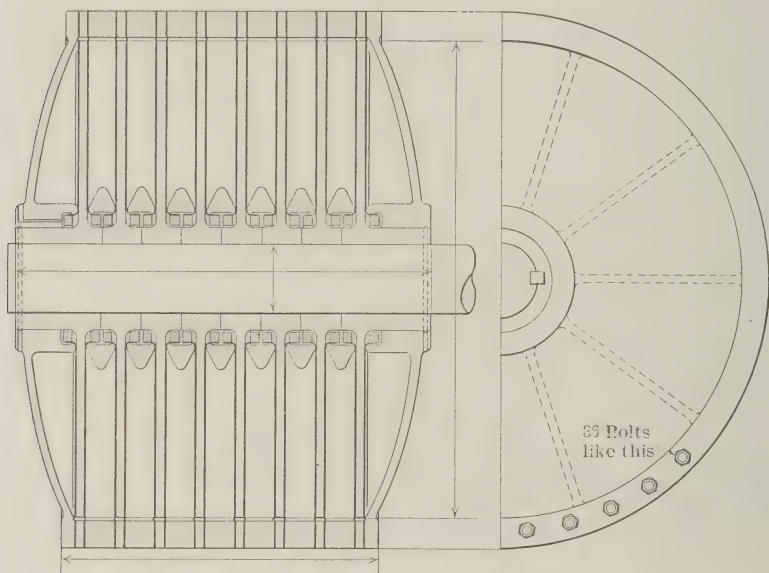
ASSEMBLY DRAWING OF 28-in. ALDEN ABSORPTION DYNAMOMETER;
